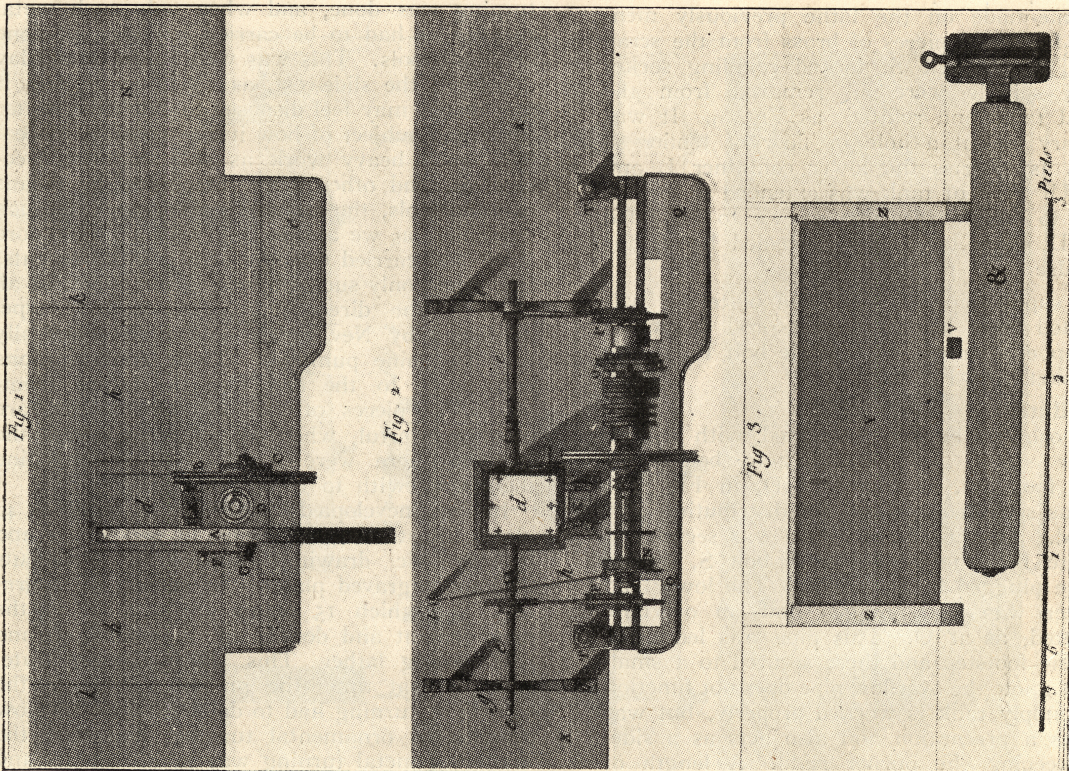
Plate I.—Three Plans of a Medallion Lathe Arrangement.
